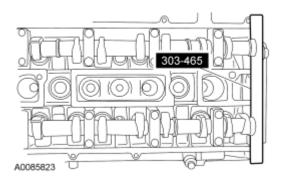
Identifying Special Camshaft Tool (303-465) Courtesy of FORD MOTOR CO.
